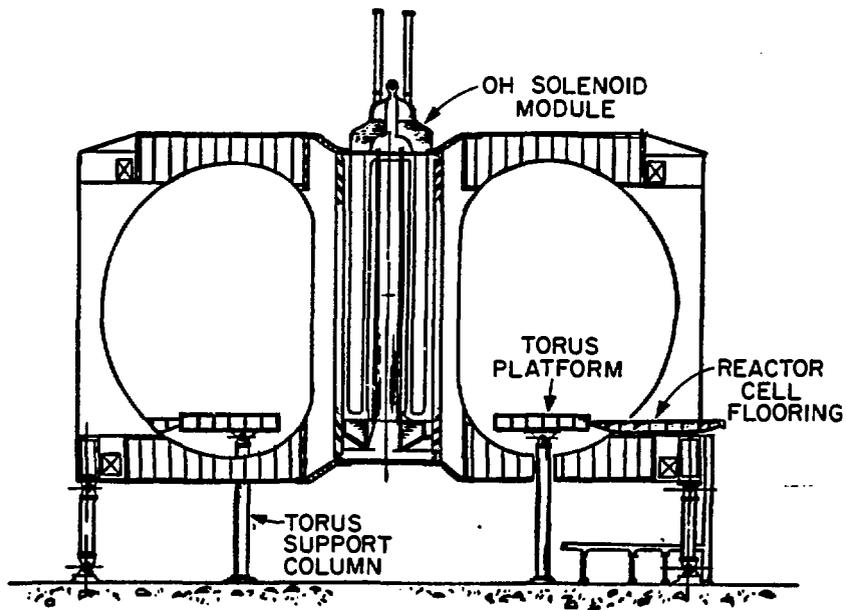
Initial assembly of the FED device - installation of torus supports, torus platform, OH solenoid module.
